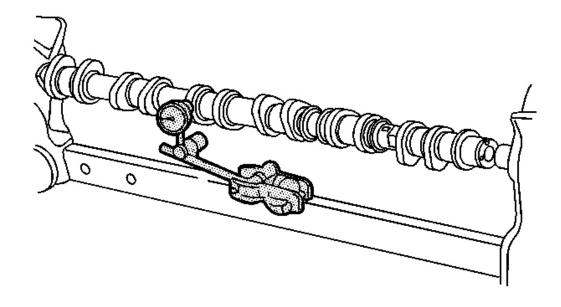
Measuring Camshaft Runout & Lobe Lift Courtesy of GENERAL MOTORS CORP.
